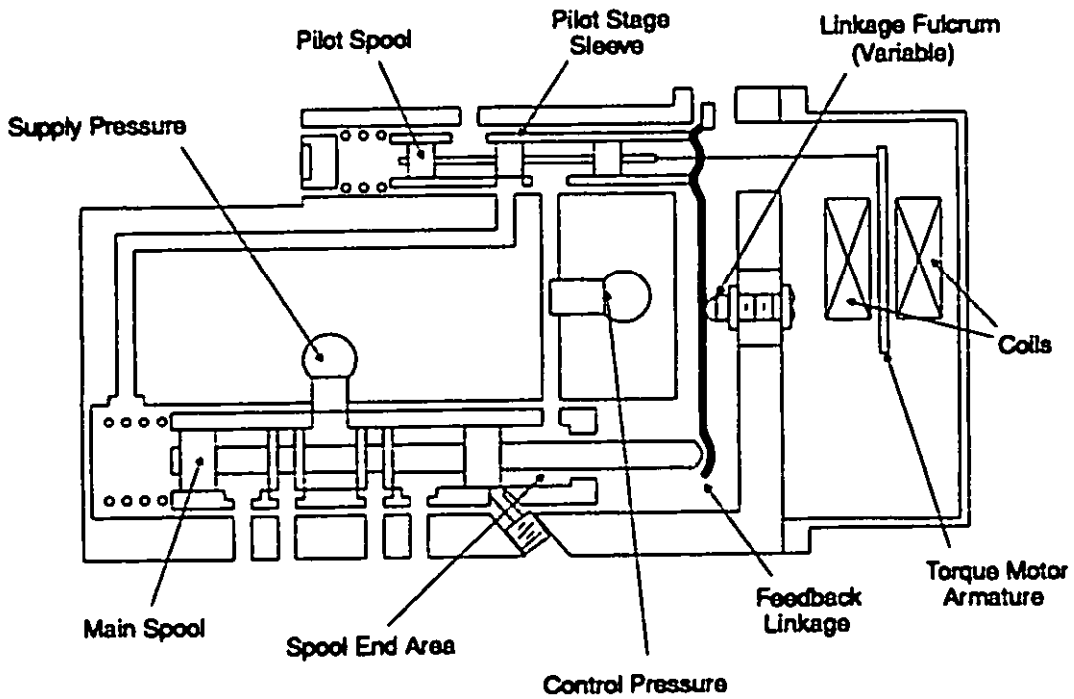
Servovalve Torque Motor (Ref. 5)
